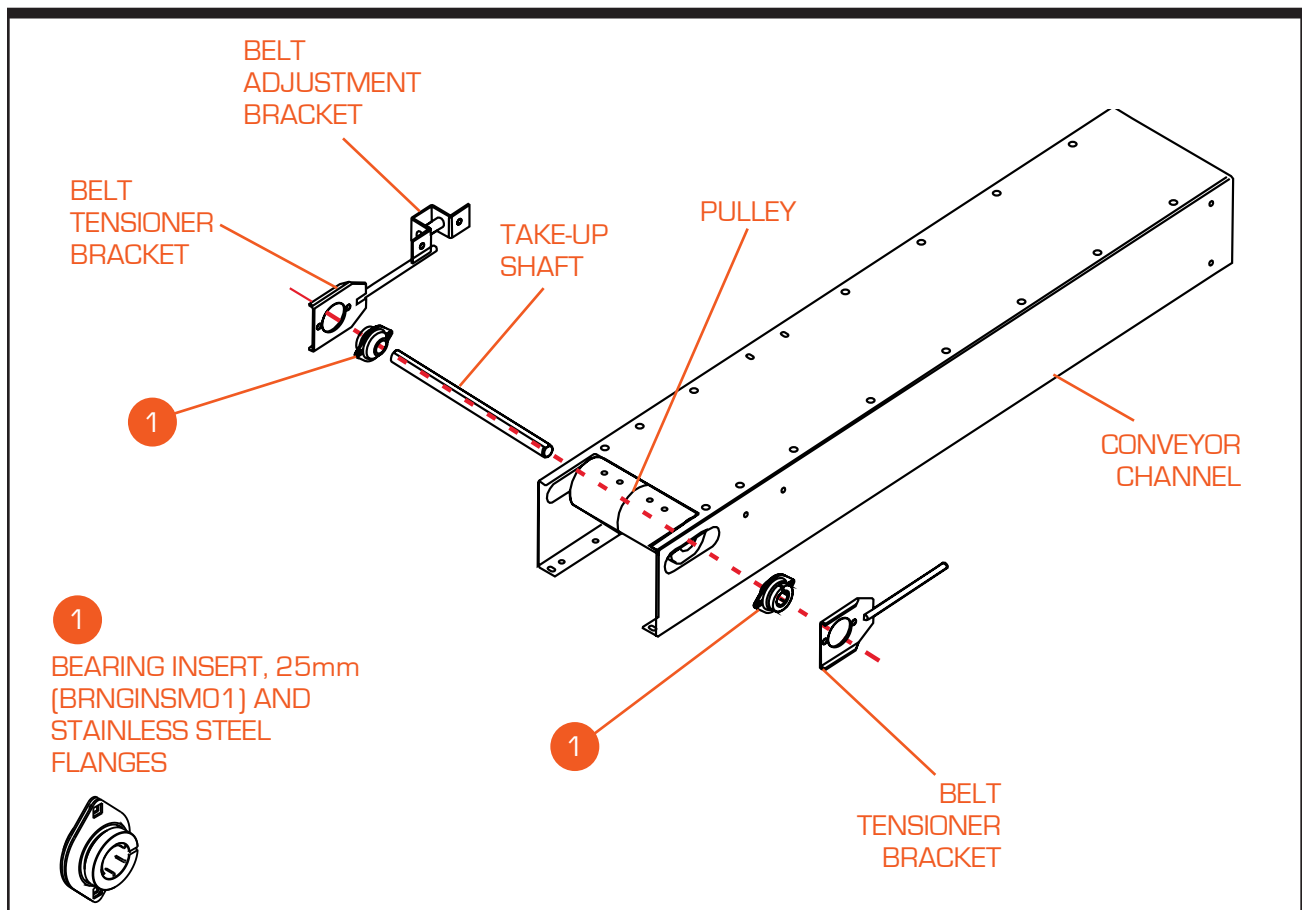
Lower Take-Up Pulley Sub-Assembly
